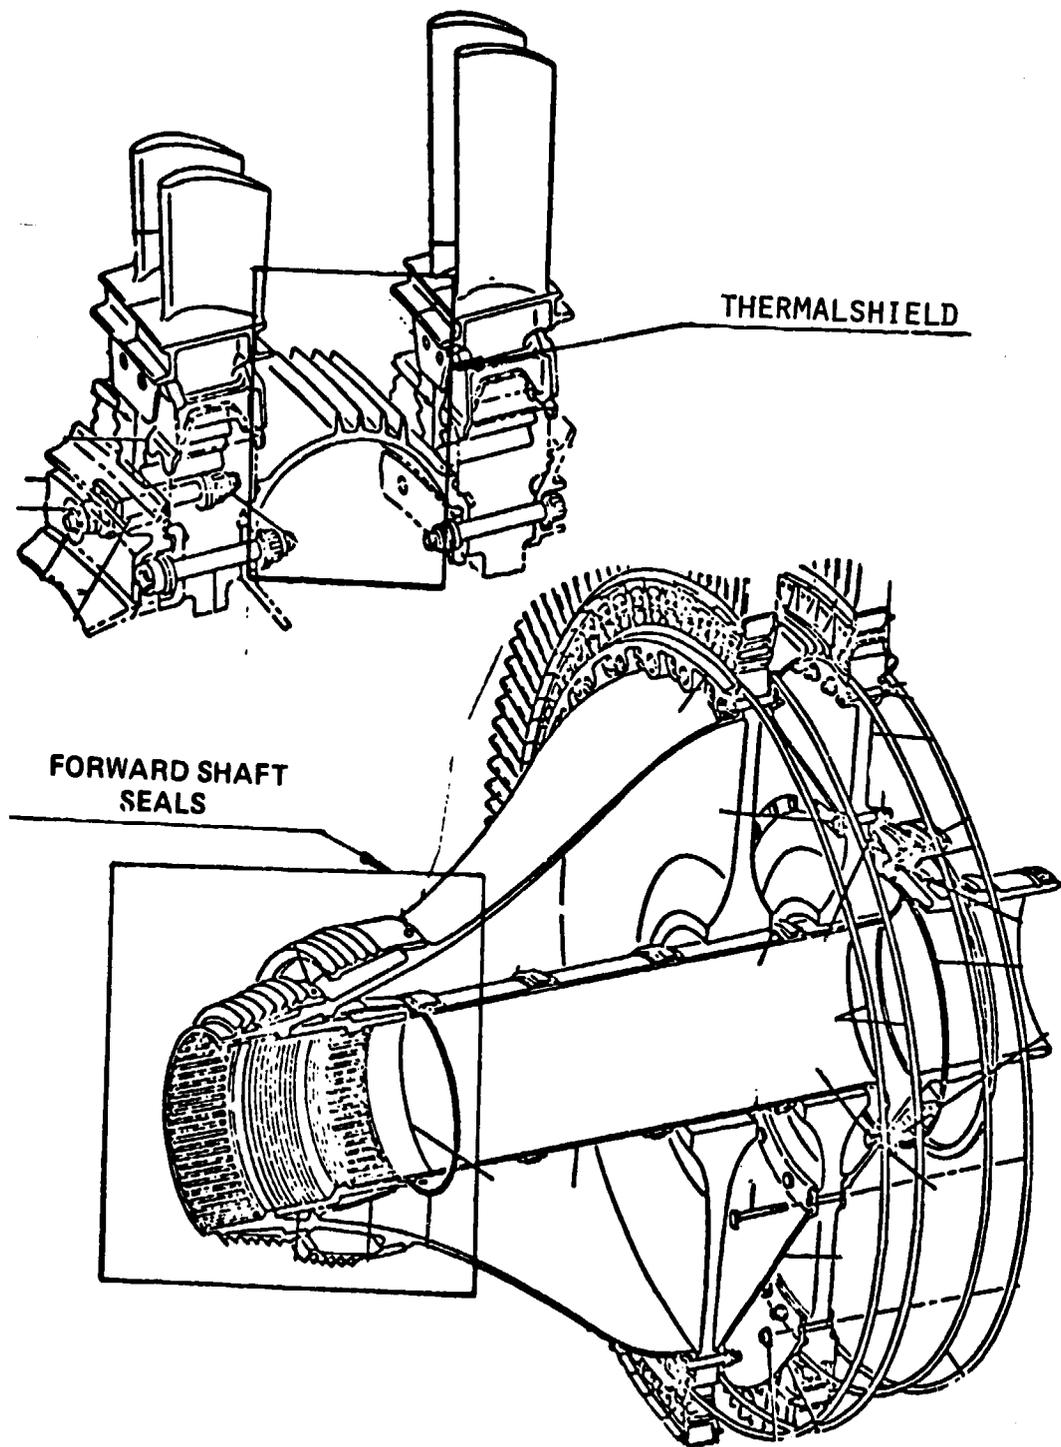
HP Turbine Rotor Forward Shaft Seals and Thermal Shield.
